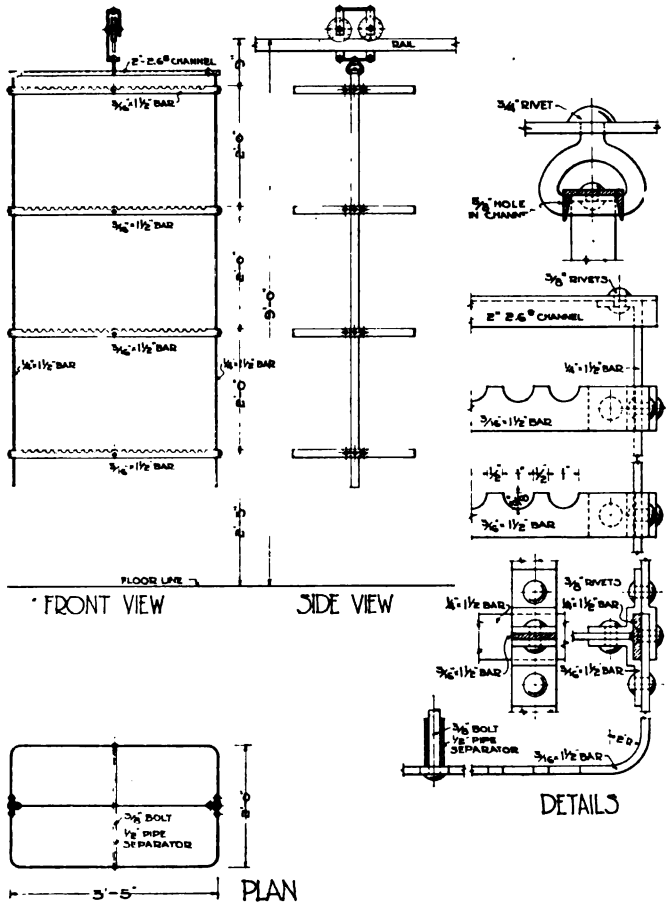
DETAILS OF SMOKE HOUSE TROLLEY.
